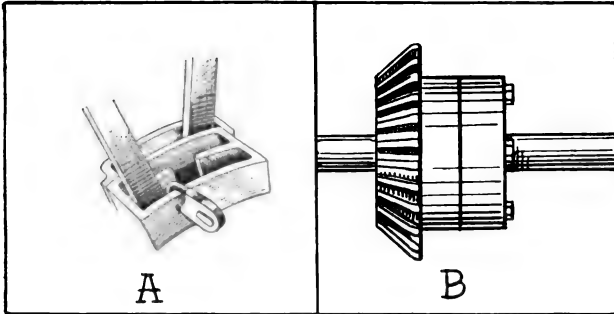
A, Car Locked with Speed Changing Lever in Reverse; B, Master Gear Ground to Quiet Noise in Differential Housing.
